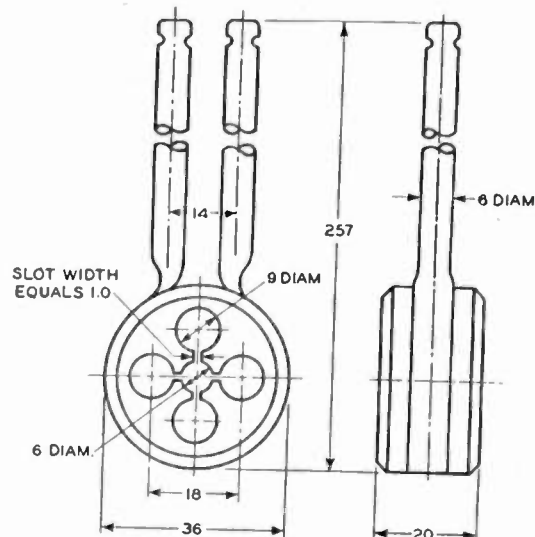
A four-cavity anode of a 9.0-centimeter magnetron. All dimensions are in millimeters.
